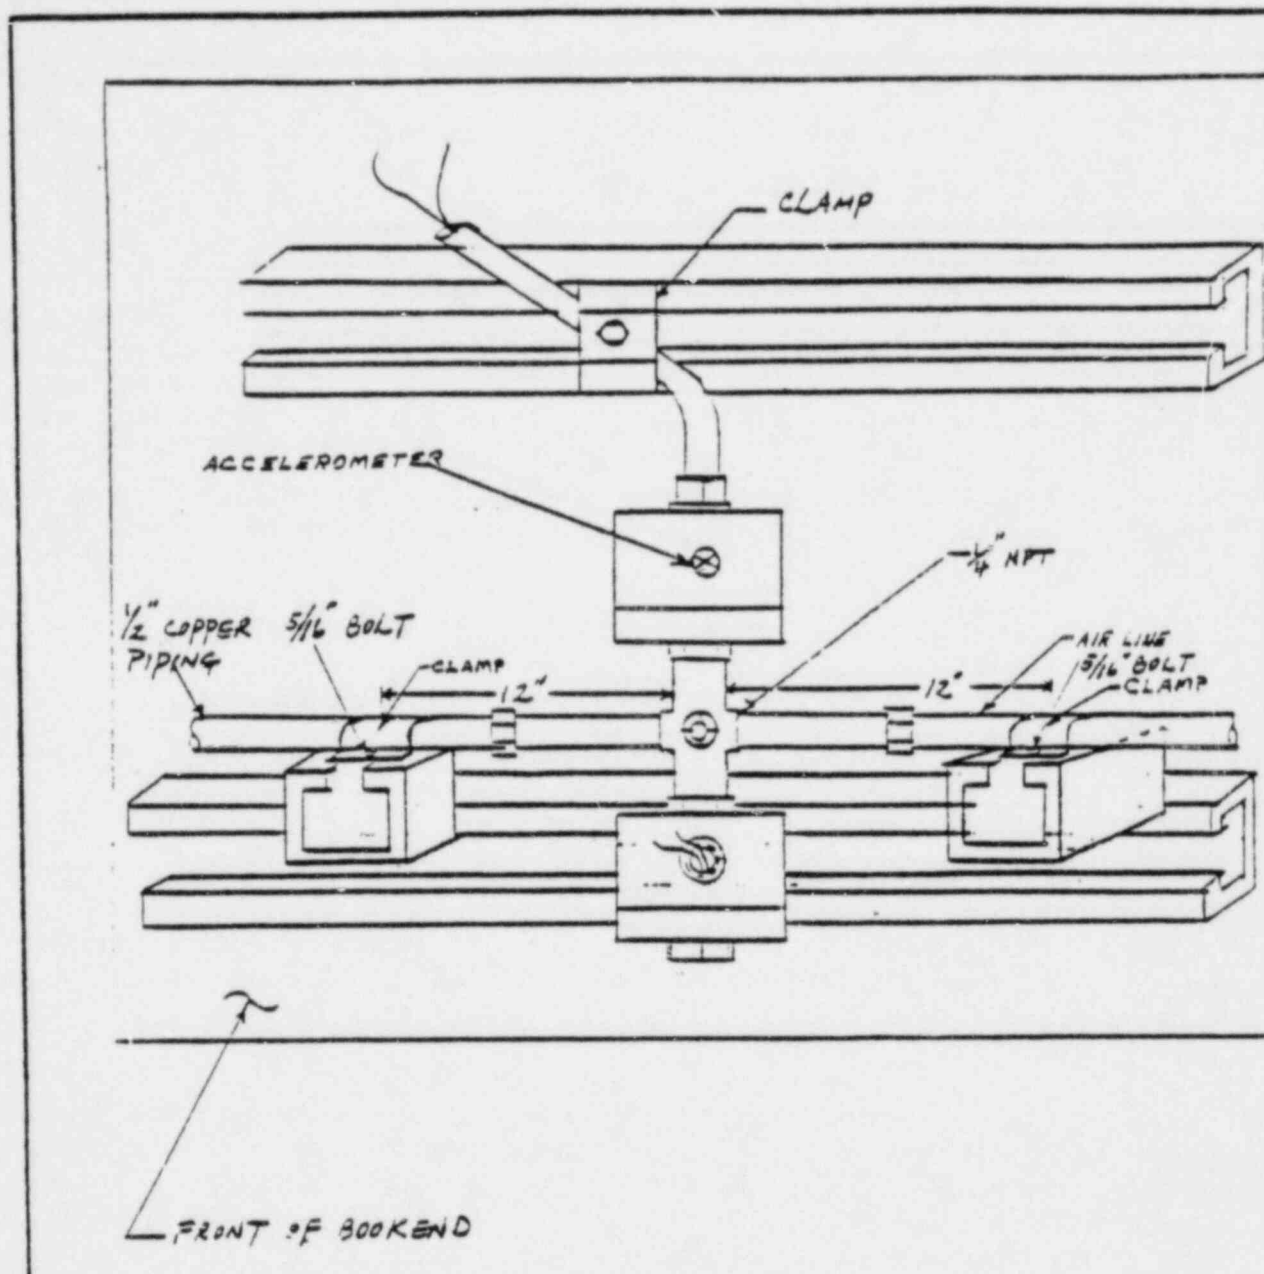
TEST SPECIMEN MOUNTING AND
